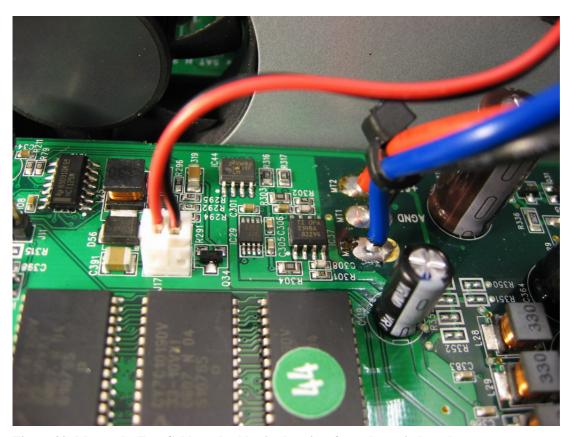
Mount the Fan-Cable and solder in the wires from the main board.
